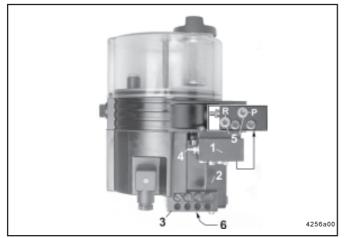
QLS 311 with bottom mounted SSV divider block
